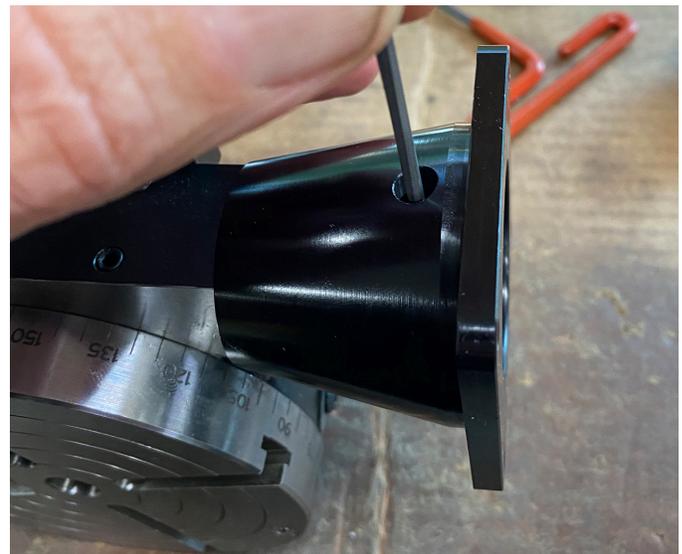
Shows the 3/32" Allen wrench inserted through the motor mount access hole.
